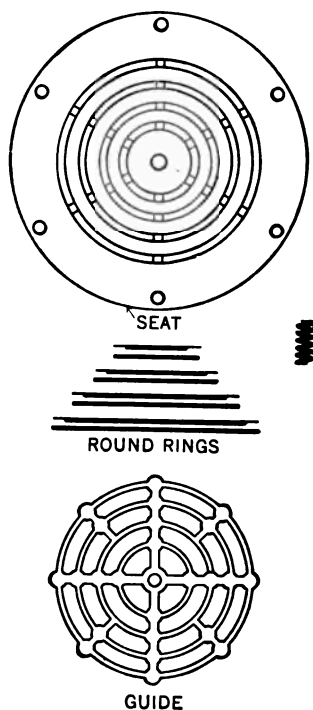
Air valve, F. M. & Co. vertical oil engine.
